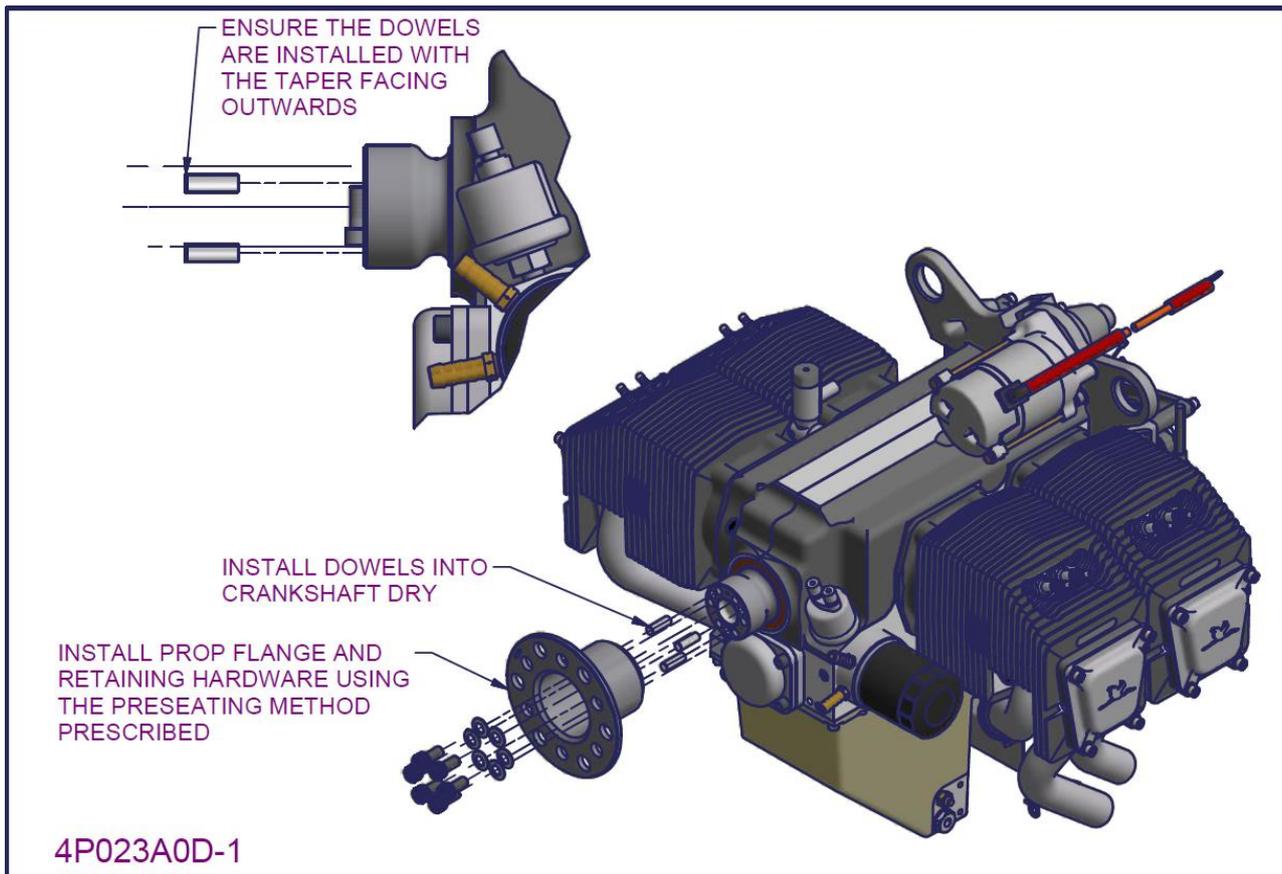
2200/3300 Front seal and propeller flange installation 3
